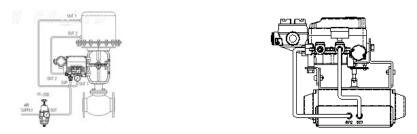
Double acting linear (left) and rotary (right) type actuator
